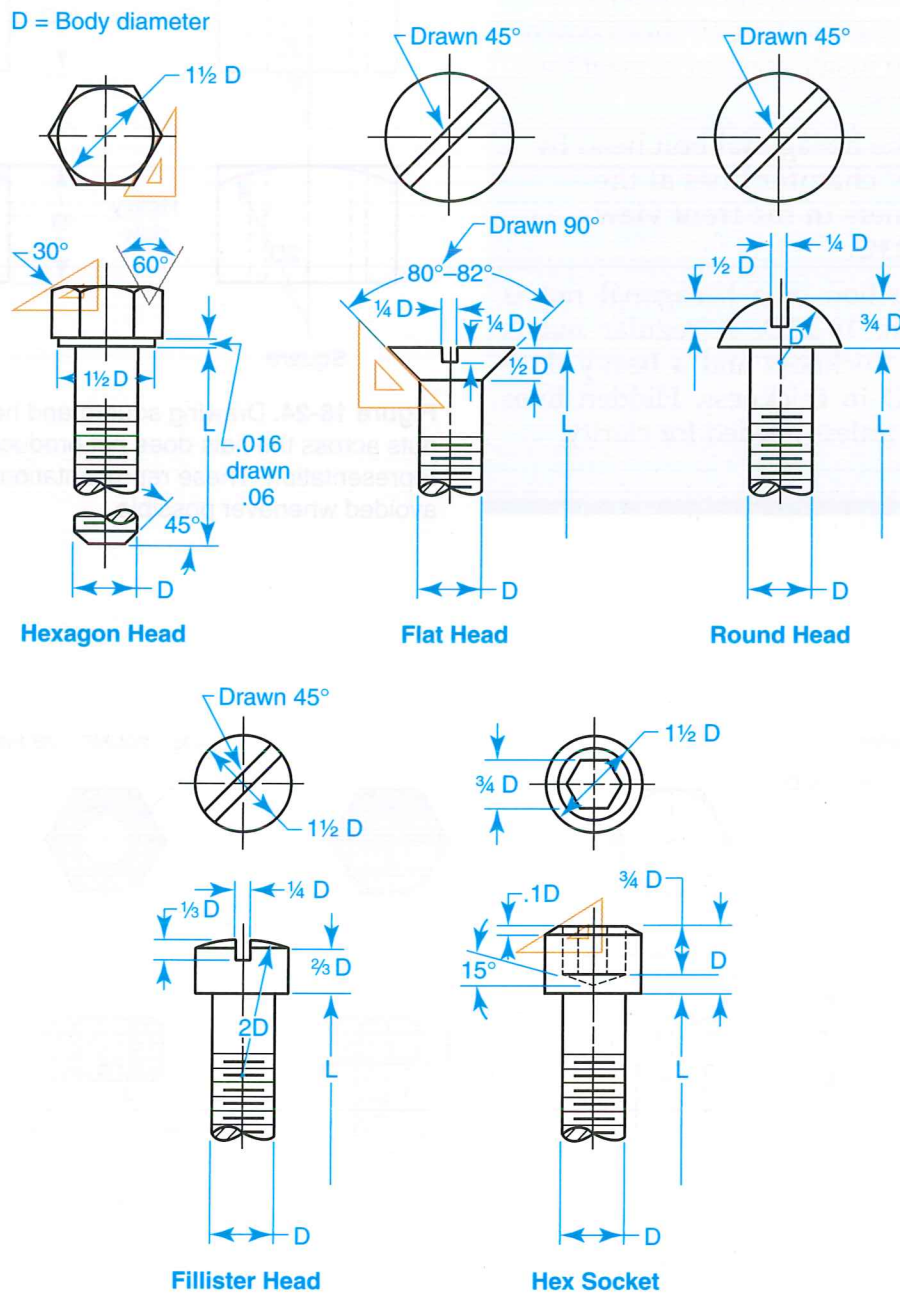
Drawing conventions for standard cap screws. Approximate dimensions are shown.
